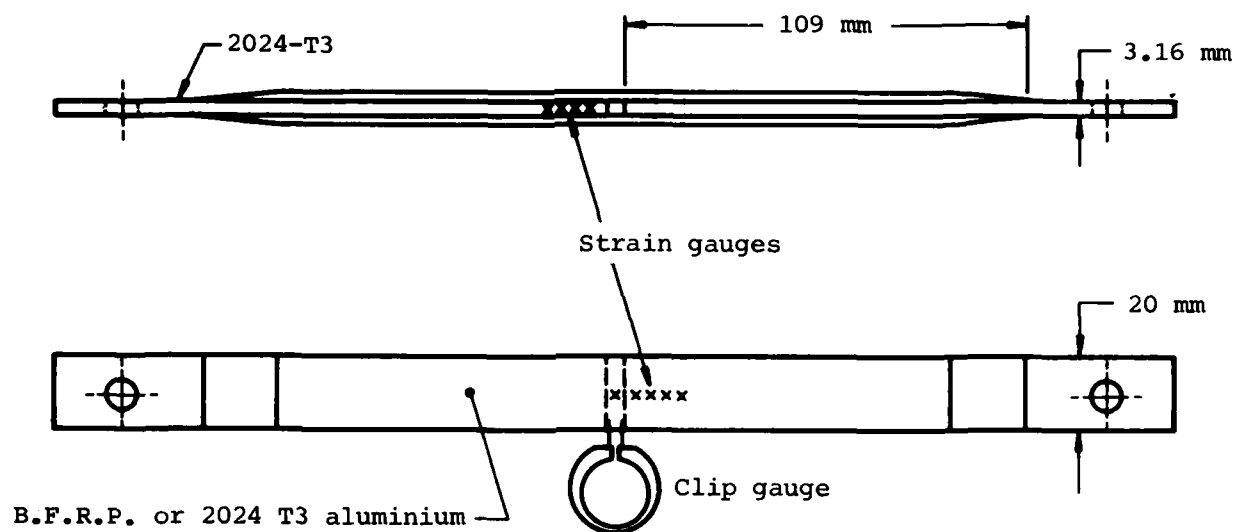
DOUBLE LAP JOINT SHOWING POSITION OF CLIP GAUGE AND STRAIN GAUGES
